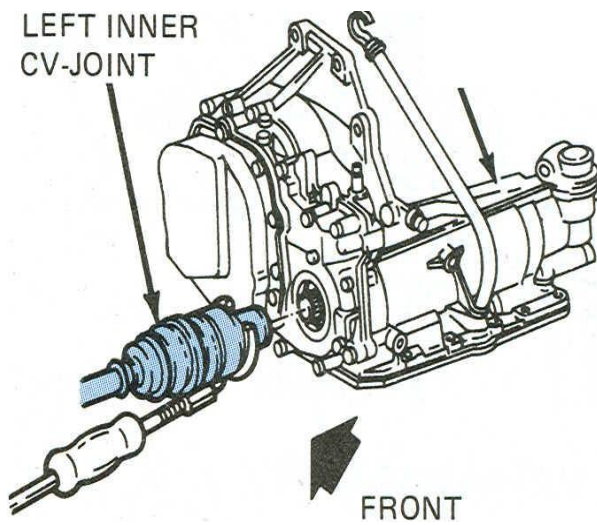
Removing half shaft assembly with CV joints from vehicle,
